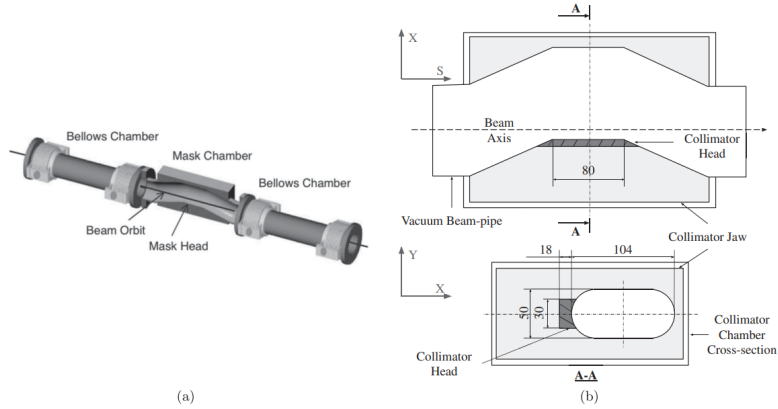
KEKB-type collimators. (a) Conceptual drawing of a KEKB-type collimator assembly. (b) Schematic of a horizontal KEKB-type collimator chamber with an 80 mm long Ti head. All dimensions are in mm. Figure adapted from [108].
